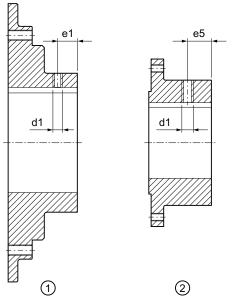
Diameter and axial position of the tapped hole in the hub
